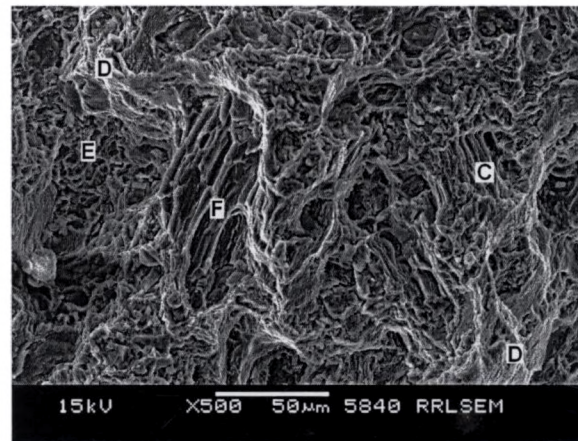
Fracture surface of AZ91+0.5% Si+0.2% Sb: (C) river pattern (D) plastic deformation (E) dimples (F) quasi-cleavage facet
